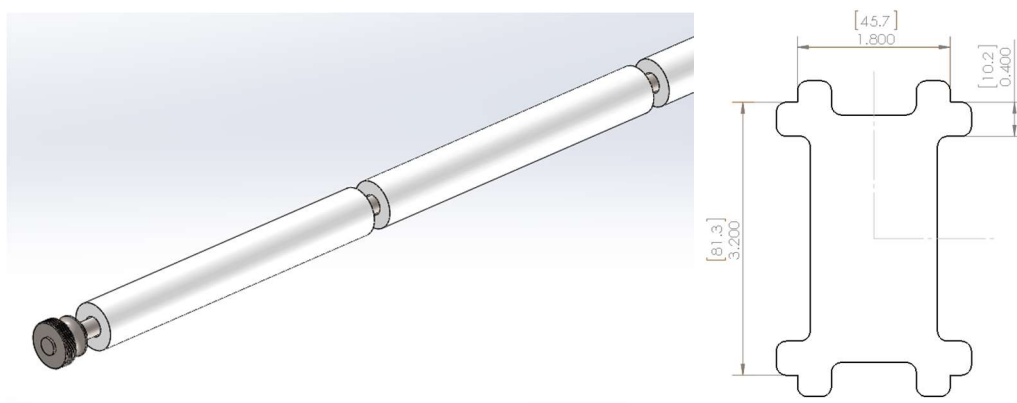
Chassis Fastening Rod and Spacers, Generic Mounting Plate
